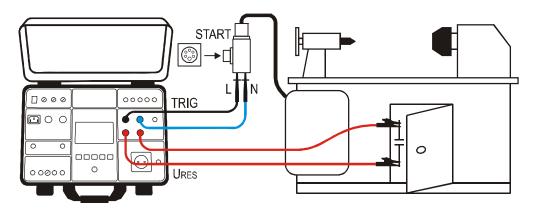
Connection of test leads in URES INT measurement on 1P/3P plugged machines
